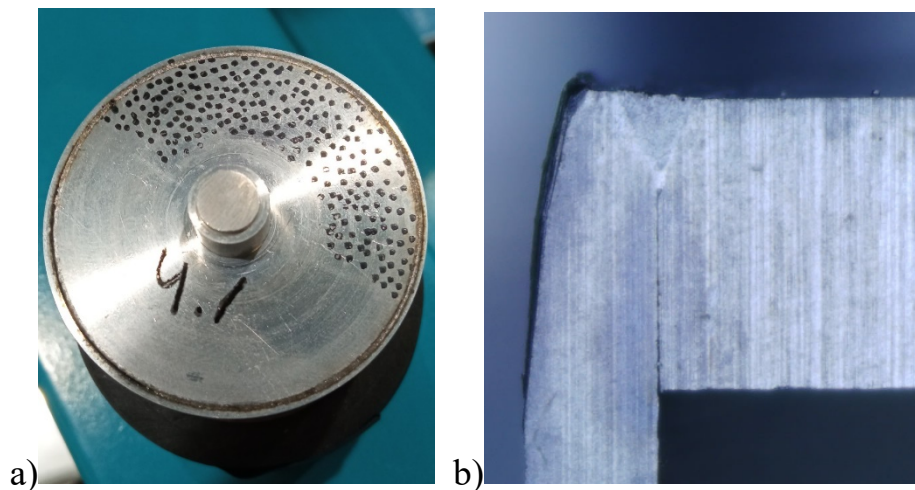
The top view of the welded imitator sample (a) of a cylindrical product and the macrostructure of the cross-section of the weld (b) made in this imitator sample
